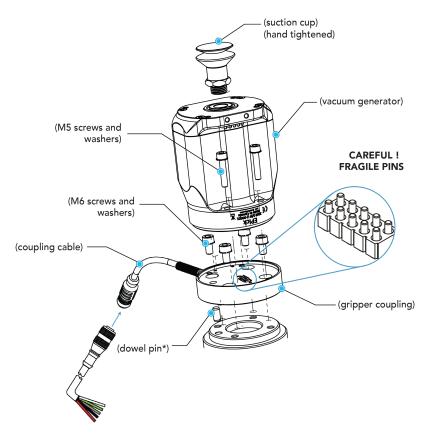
Installing the Vacuum Gripper onto the robot wrist
